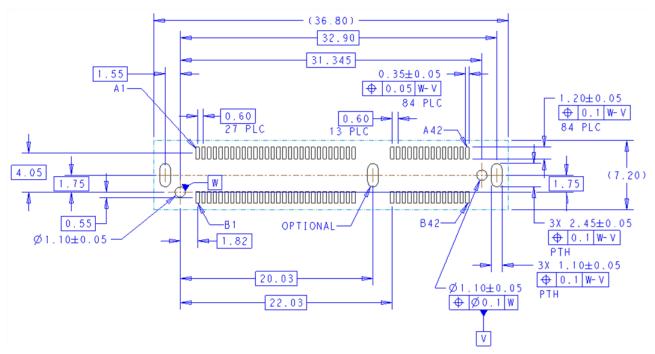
2C STRAIGHT CONNECTOR FOOTPRINT
